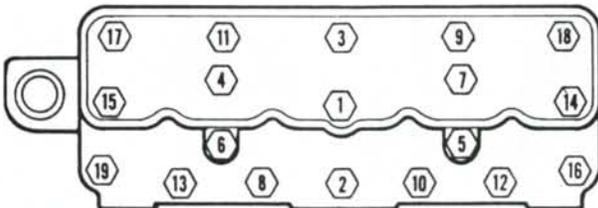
Tighten four-cylinder engine head bolts in four steps following sequence illustrated.
